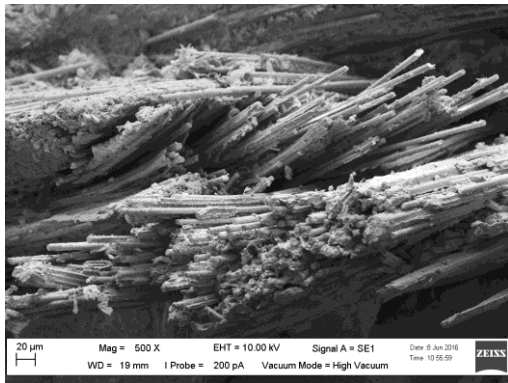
Tail Rotor Blade fracture direction due to the impact
